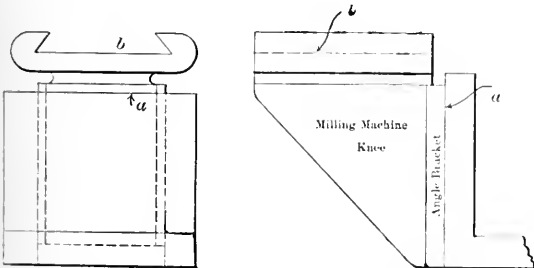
Methods used to Accurately Finish a Milling Machine Knee.
